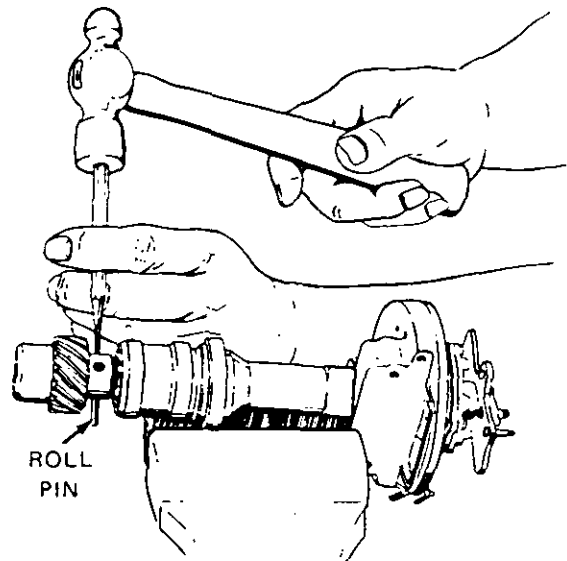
C Distributor Disassembly, Test and Reassembly (Coil in Cap) 1 of 3
